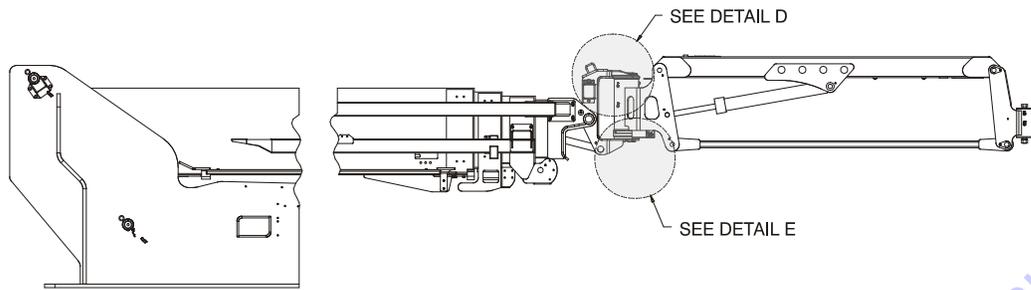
Boom/Jib Sensors and Switches Installation - Sheet 1 of 4
